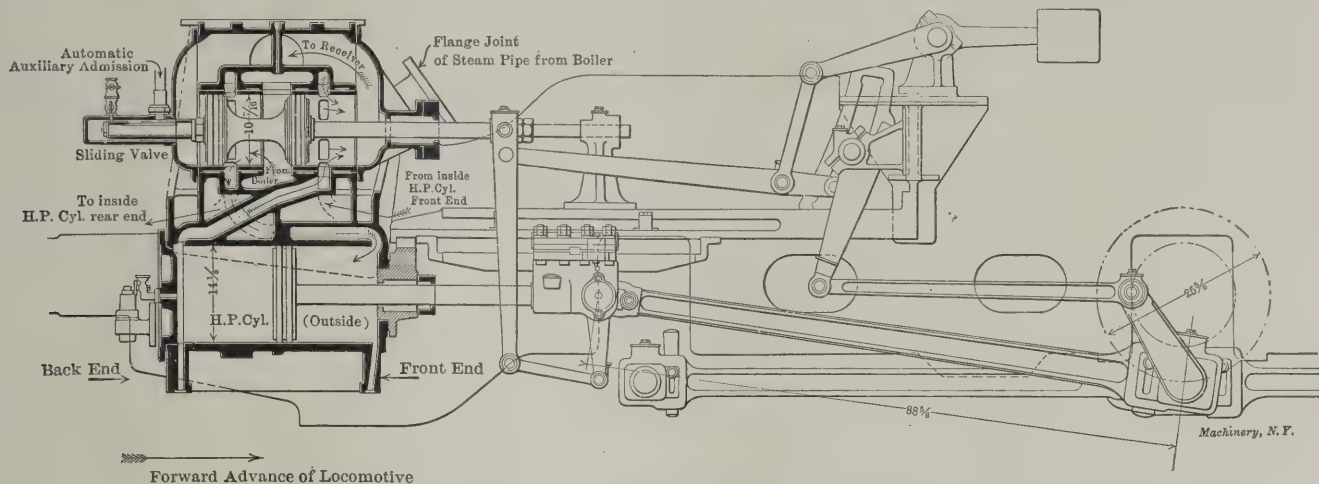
Section of Outside High-pressure Cylinder and Valve, Adriatic Type Engine.
